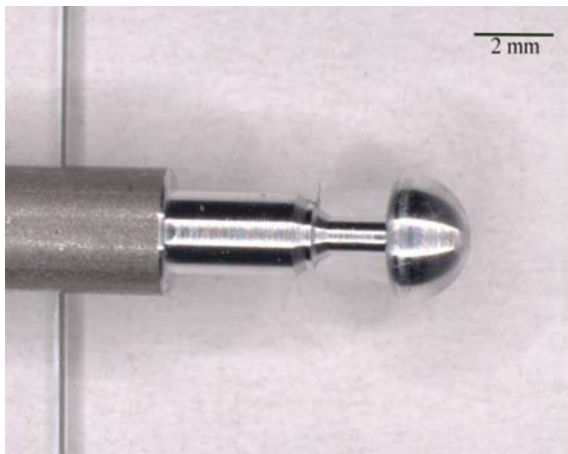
Direct Die Manufacturing by Micro-EDM Milling.
